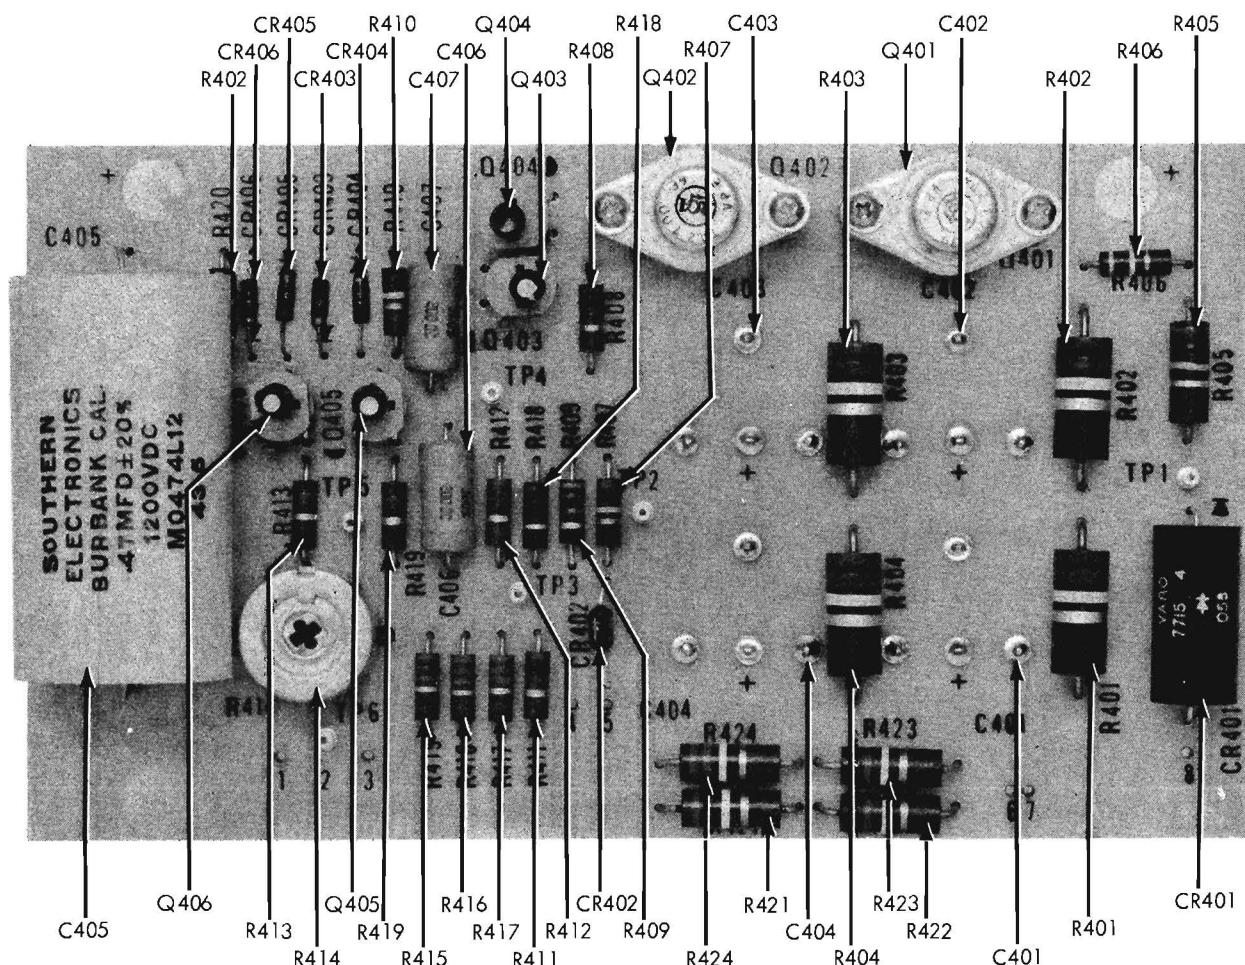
HIGH VOLTAGE BOARD ASSEMBLY
